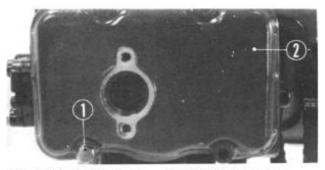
① 6 mm bolts ② Cylinder head cover
